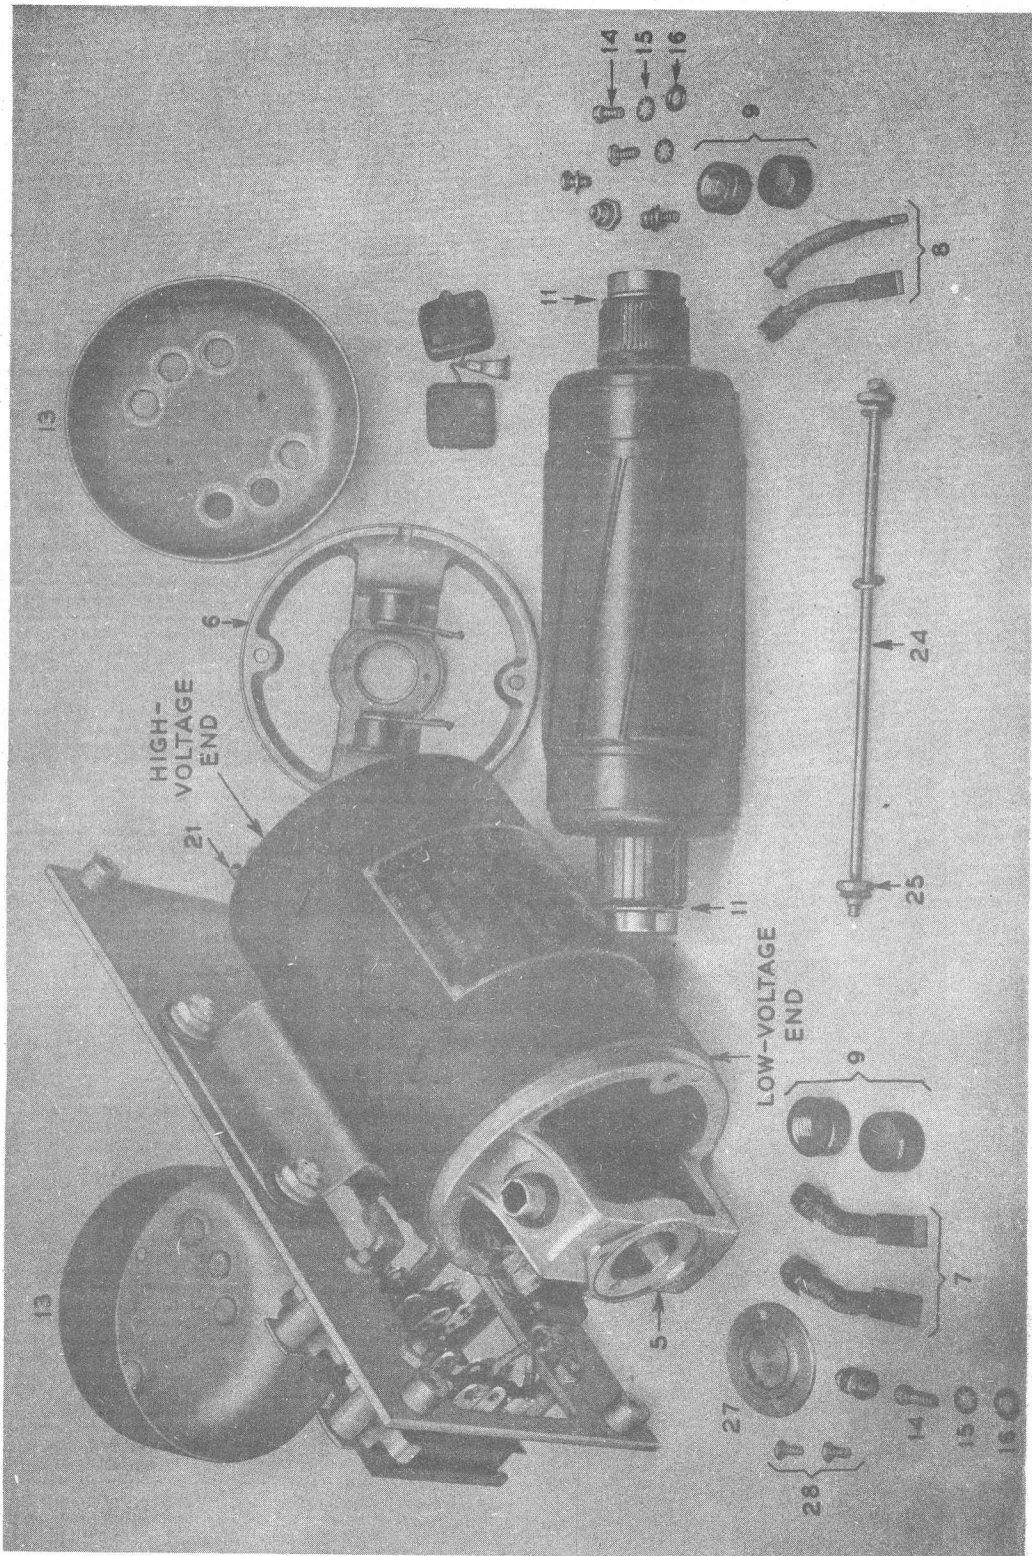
Dynamotor DM-35-(\*) or Dynamotor DM-37-(\*): Exploded View
